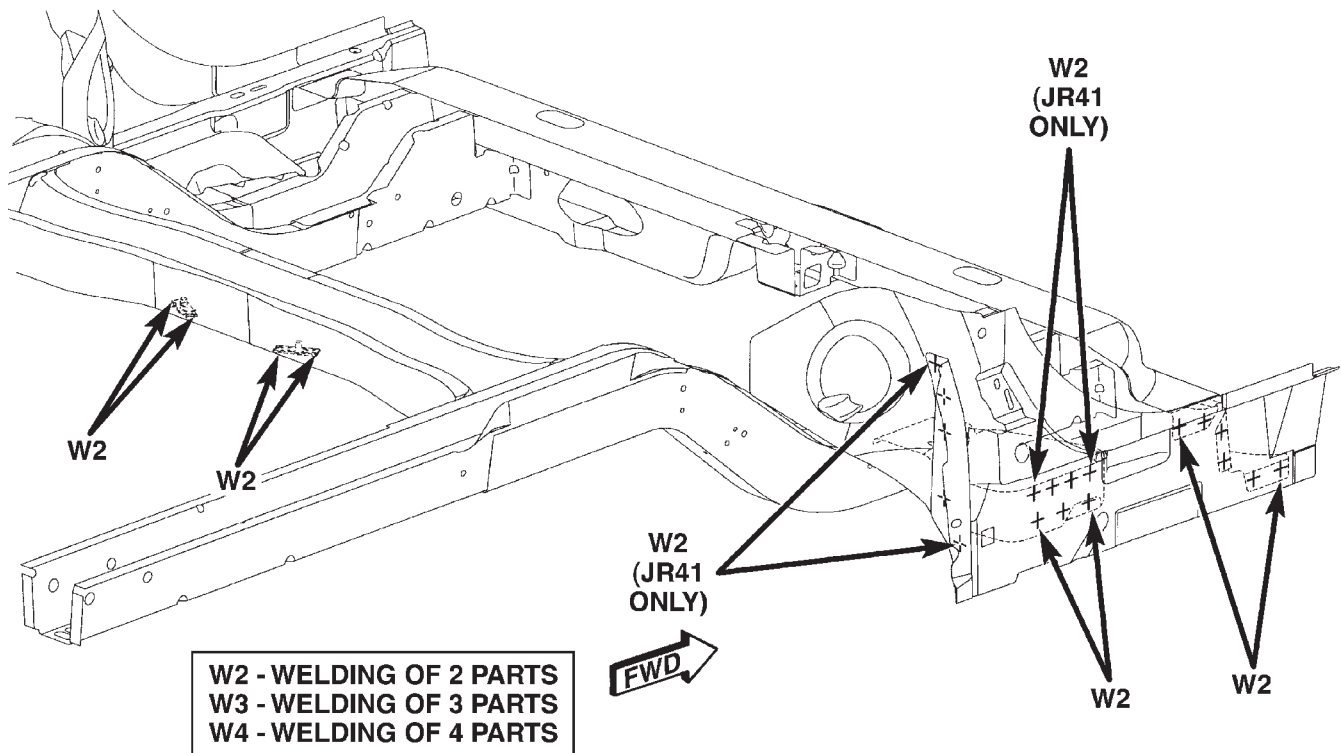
WELD STUD TO SEAT BELT ANCHOR REINFORCEMENT & SPARE WHEEL BRACKET
